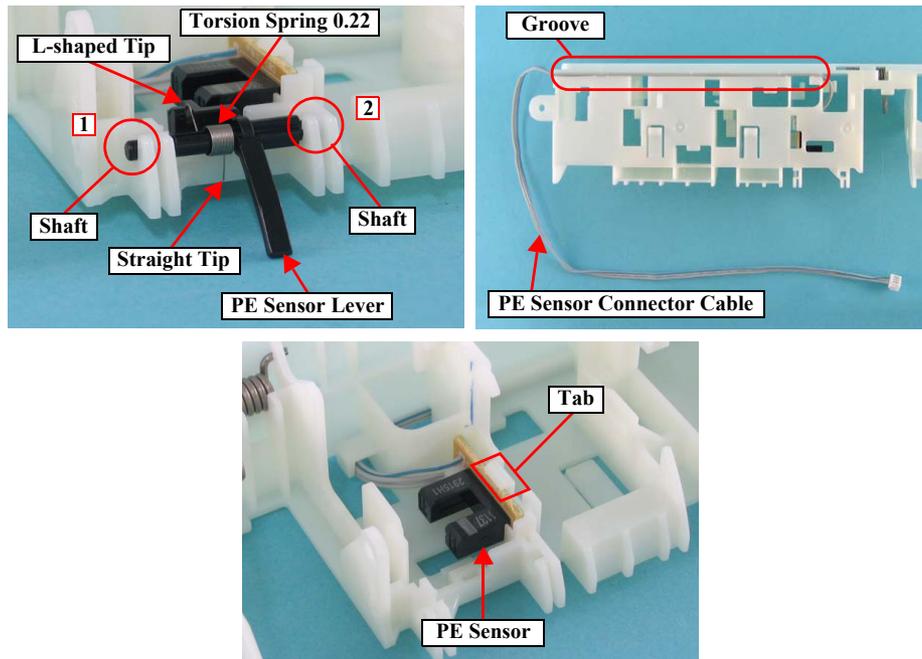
Removing PE Sensor Board/PE Sensor Lever
